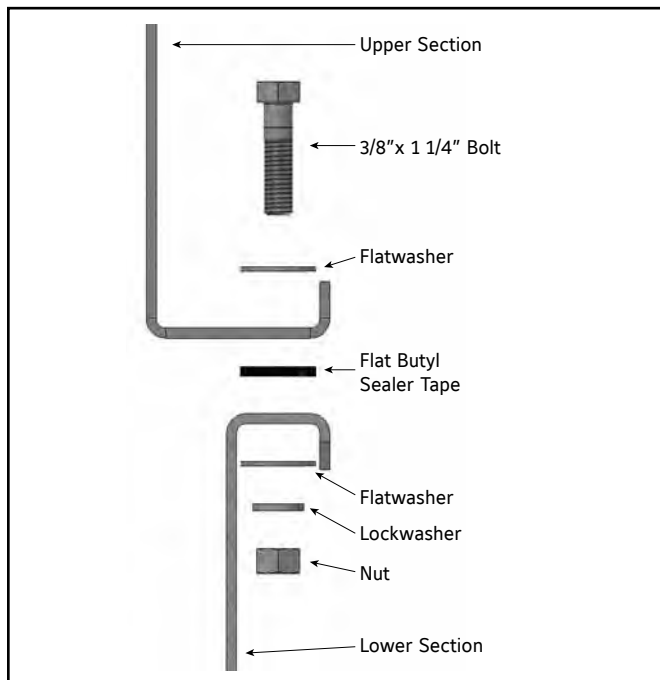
Coil Casing/Lower Section Bolt Assembly
